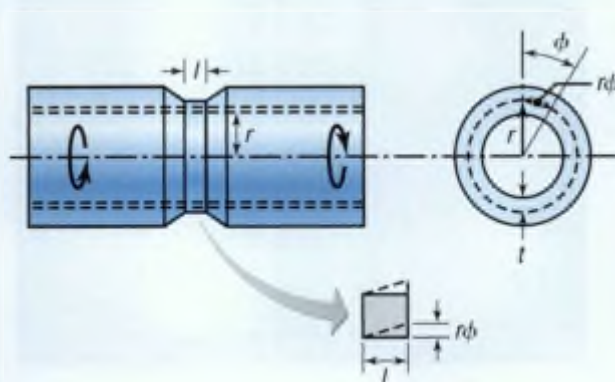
A typical torsion-test specimen; it is mounted between the two heads of a testing machine and twisted; note the shear deformation of an element in the reduced section of the specimen.
